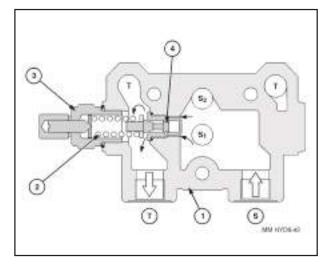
SYSTEM RELIEF VALVE OPEN
